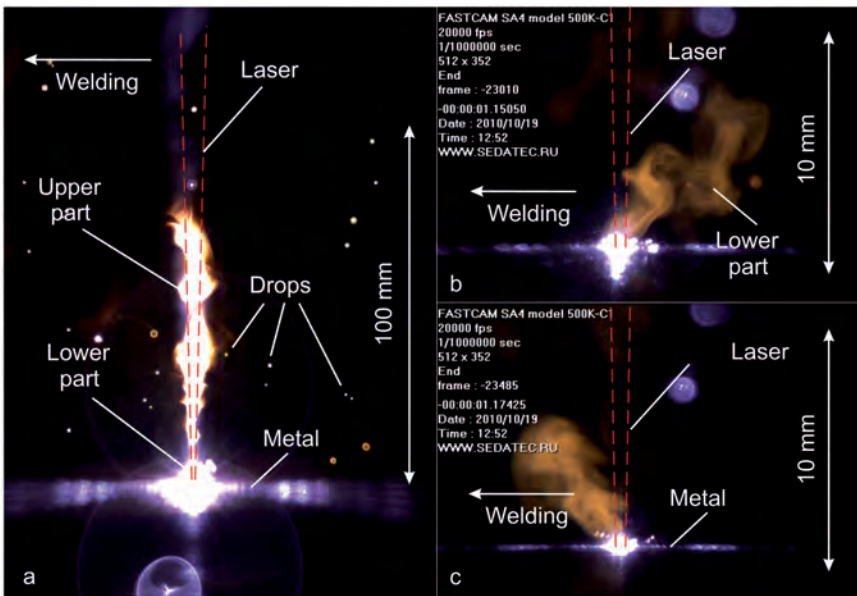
High-speed video observation of different parts of the welding plume
